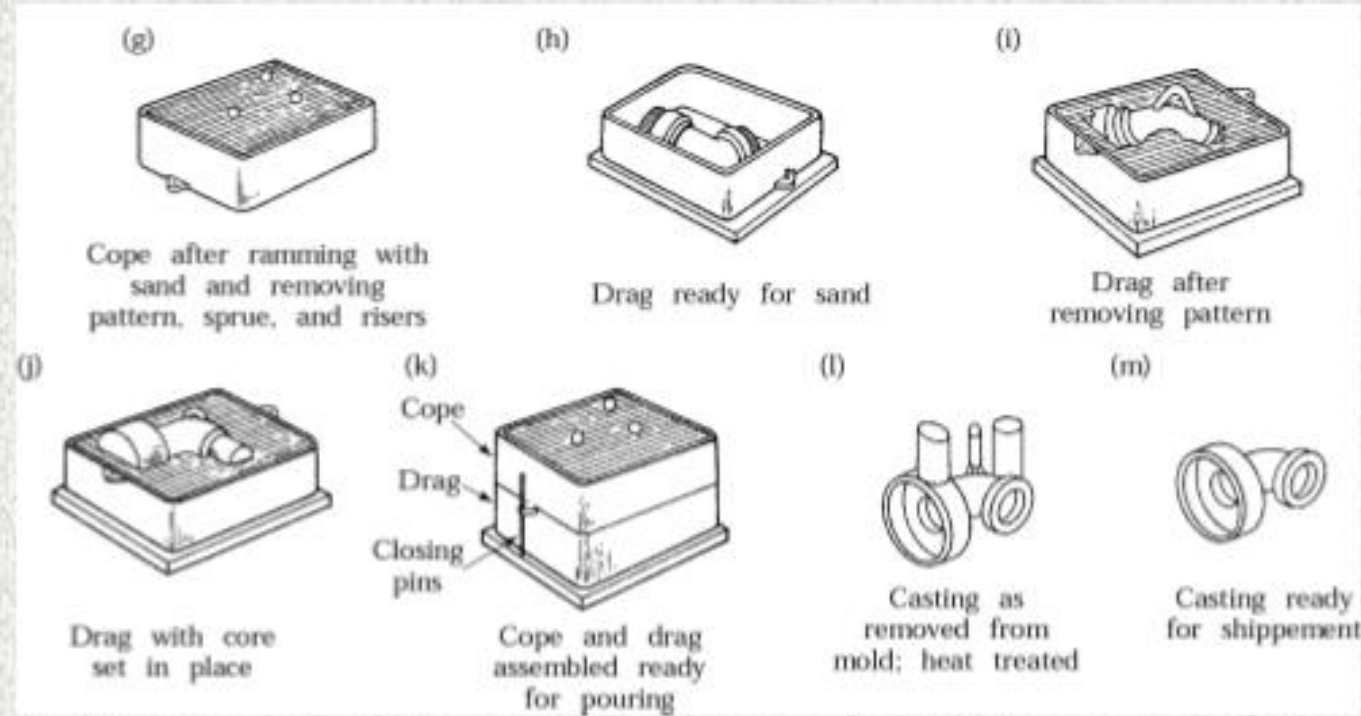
(g) The flask is rammed with sand and the plate and inserts are removed. (g) The drag half is produced in a similar manner, with the pattern inserted. A bottom board is placed below the drag and aligned with pins. (i) The pattern, flask, and bottom board are inverted, and the pattern is withdrawn, leaving the appropriate imprint. (j) The core is set in place within the drag cavity. (k) The mold is closed by placing the cope on top of the drag and buoyant forces in the liquid, which might lift the cope. (l) After the metal solidifies, the casting is removed from the mold. (m) The sprue and risers are cut off and recycled and the casting is cleaned, inspected, and heat treated (when necessary).
